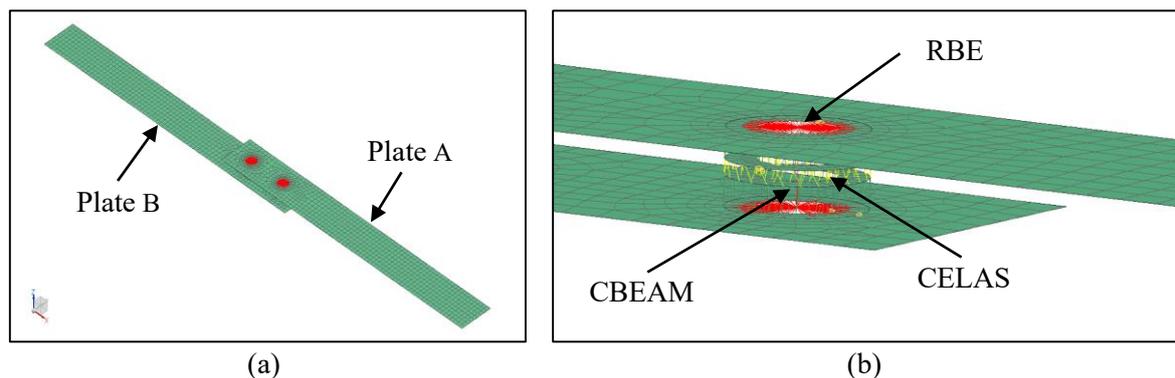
(a) Finite element model of the assembled Plate A and Plate B; (b) Representation of bolt, nut and assembly interface.
